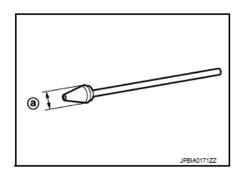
Identifying Adapter Picking Up End Diameter Courtesy of NISSAN NORTH AMERICA, INC.
